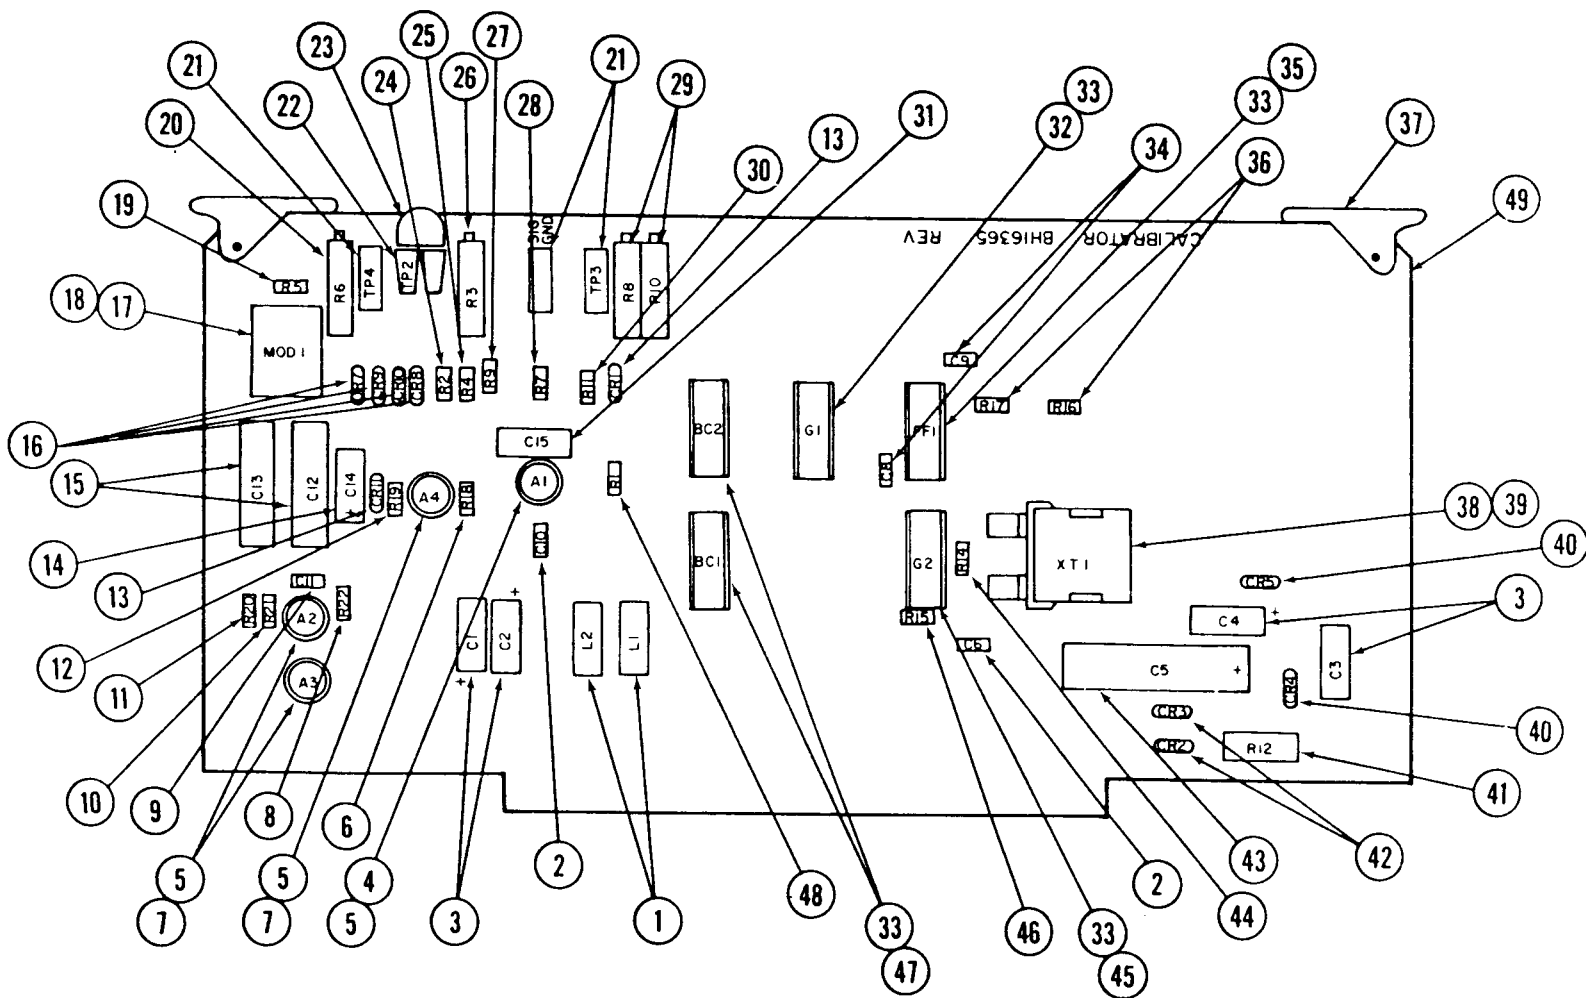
BH16365-1 Calibrator Circuit Board Assembly
